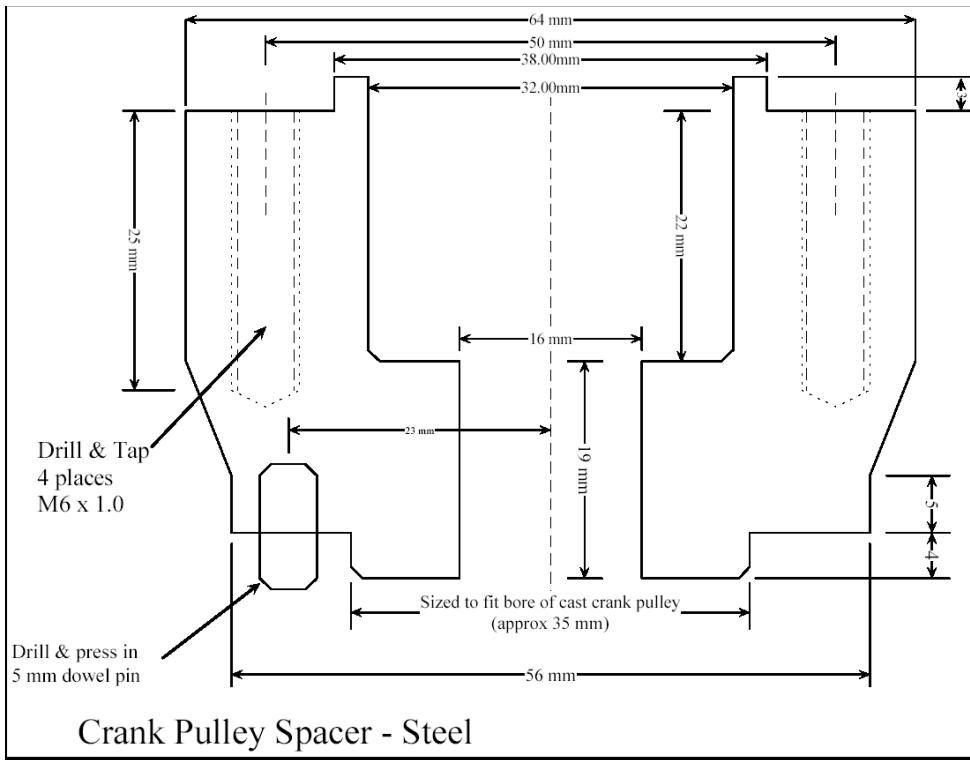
Pulley Spacer CAD Drawing (prior to minor design modifications)
